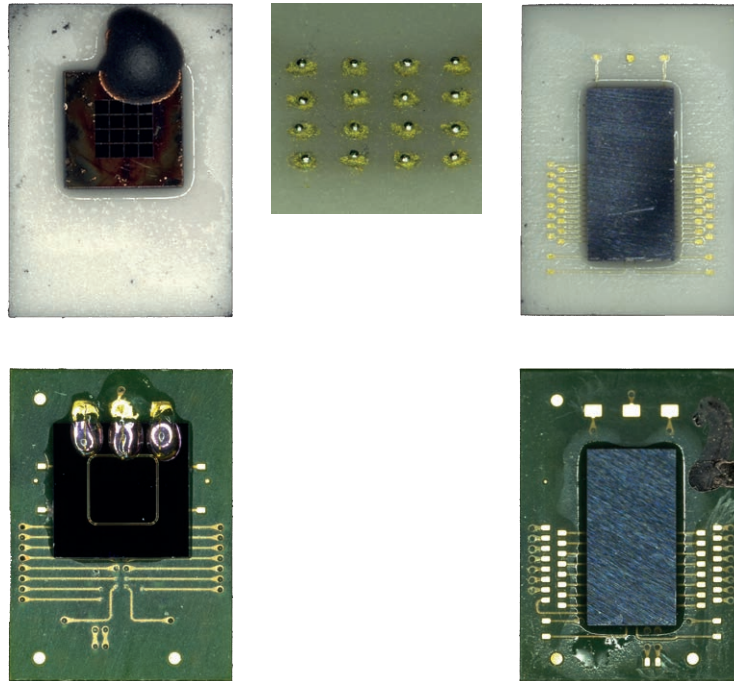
16 pixel assemblies on both interposer types: Ceramic (top) and PCB (bottom). The top side of each assembly with mounted sensor is shown in the right column. The bump pads connecting the sensor to the ASIC are shown in the middle: Gold filled vias with applied solder bumps.
